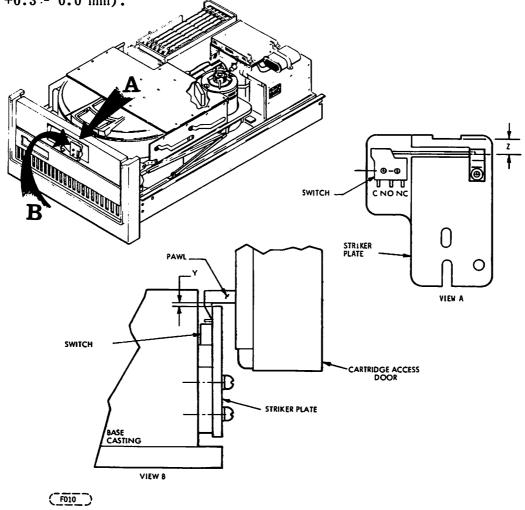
C. CARTRIDGE ACCESS DOOR INTERLOCK SWITCH AND STRIKER PLATE ADJUSTMENT
